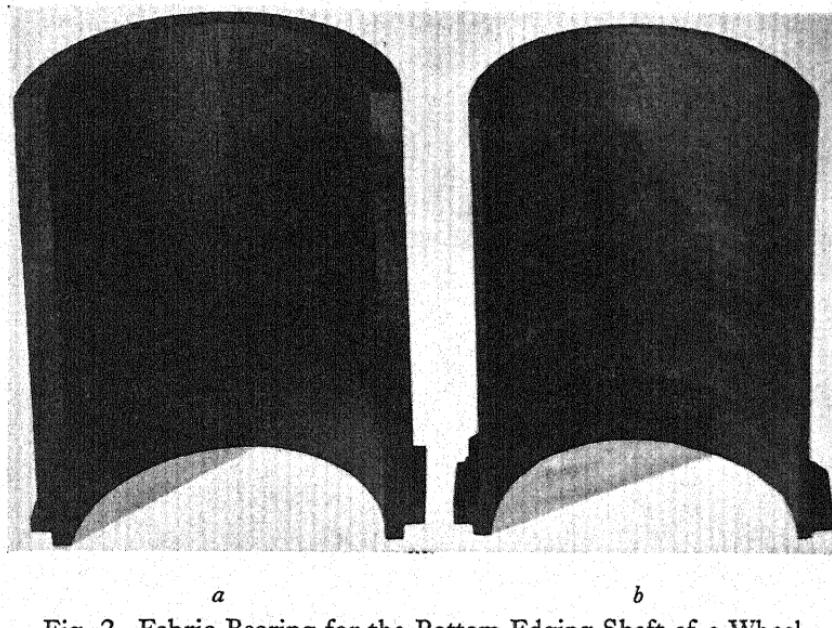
Fabric Bearing for the Bottom Edging Shaft of a Wheel Rolling Mill
